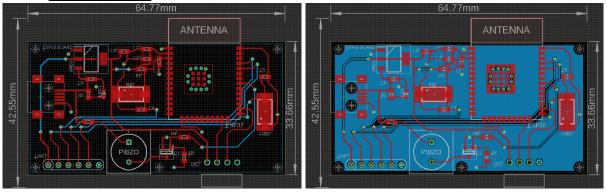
ESP32 Board Layout (a. w/o GND place; b. w/ GND plane)
